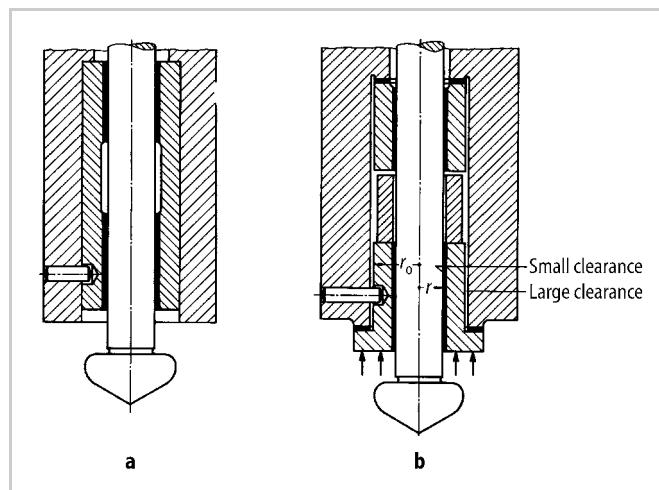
Spindle seals of steam valves: a fixed sleeve requires relatively large spindle clearance because it has not been designed to allow for expansion; b radially free and axially sealed sleeves permit small spindle clearance because spindle and sleeves have been designed to have the same time constant
